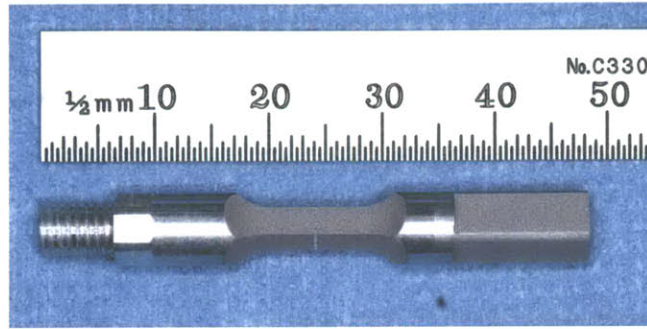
Force transducer body after CNC machining in the turn/mill and EDM, and before preparation for strain gage bonding.
